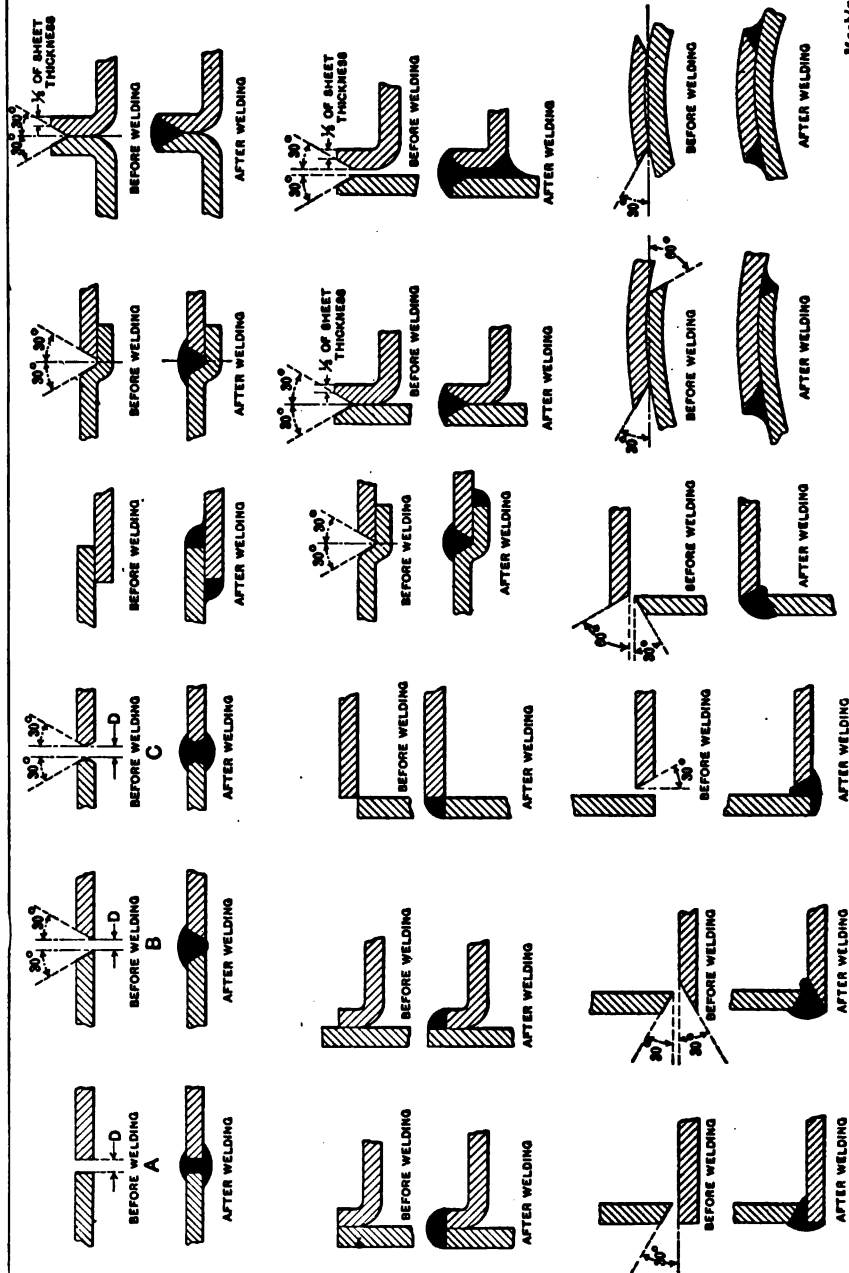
Methods of preparing sheet-metal work for welding
